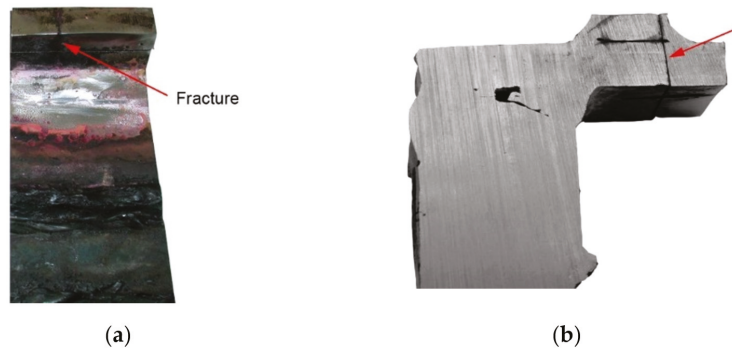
Macroscopic examination of the surface X surroundings (handy-size bulk carrier 30206 DWT): (a) the examined bar cut out from parts II and III with a visible crack and (b) the lateral surface of the bar cut out (the location of the next cut is shown).
